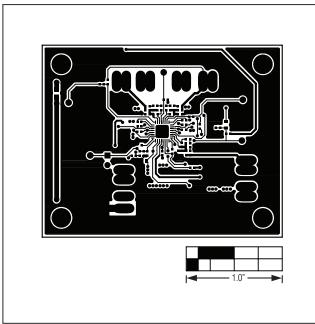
MAX15049 EV Kit PCB Layout—Solder Side
